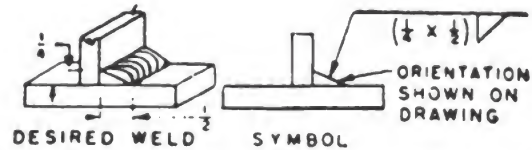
Size of fillet weld having unequal legs.
